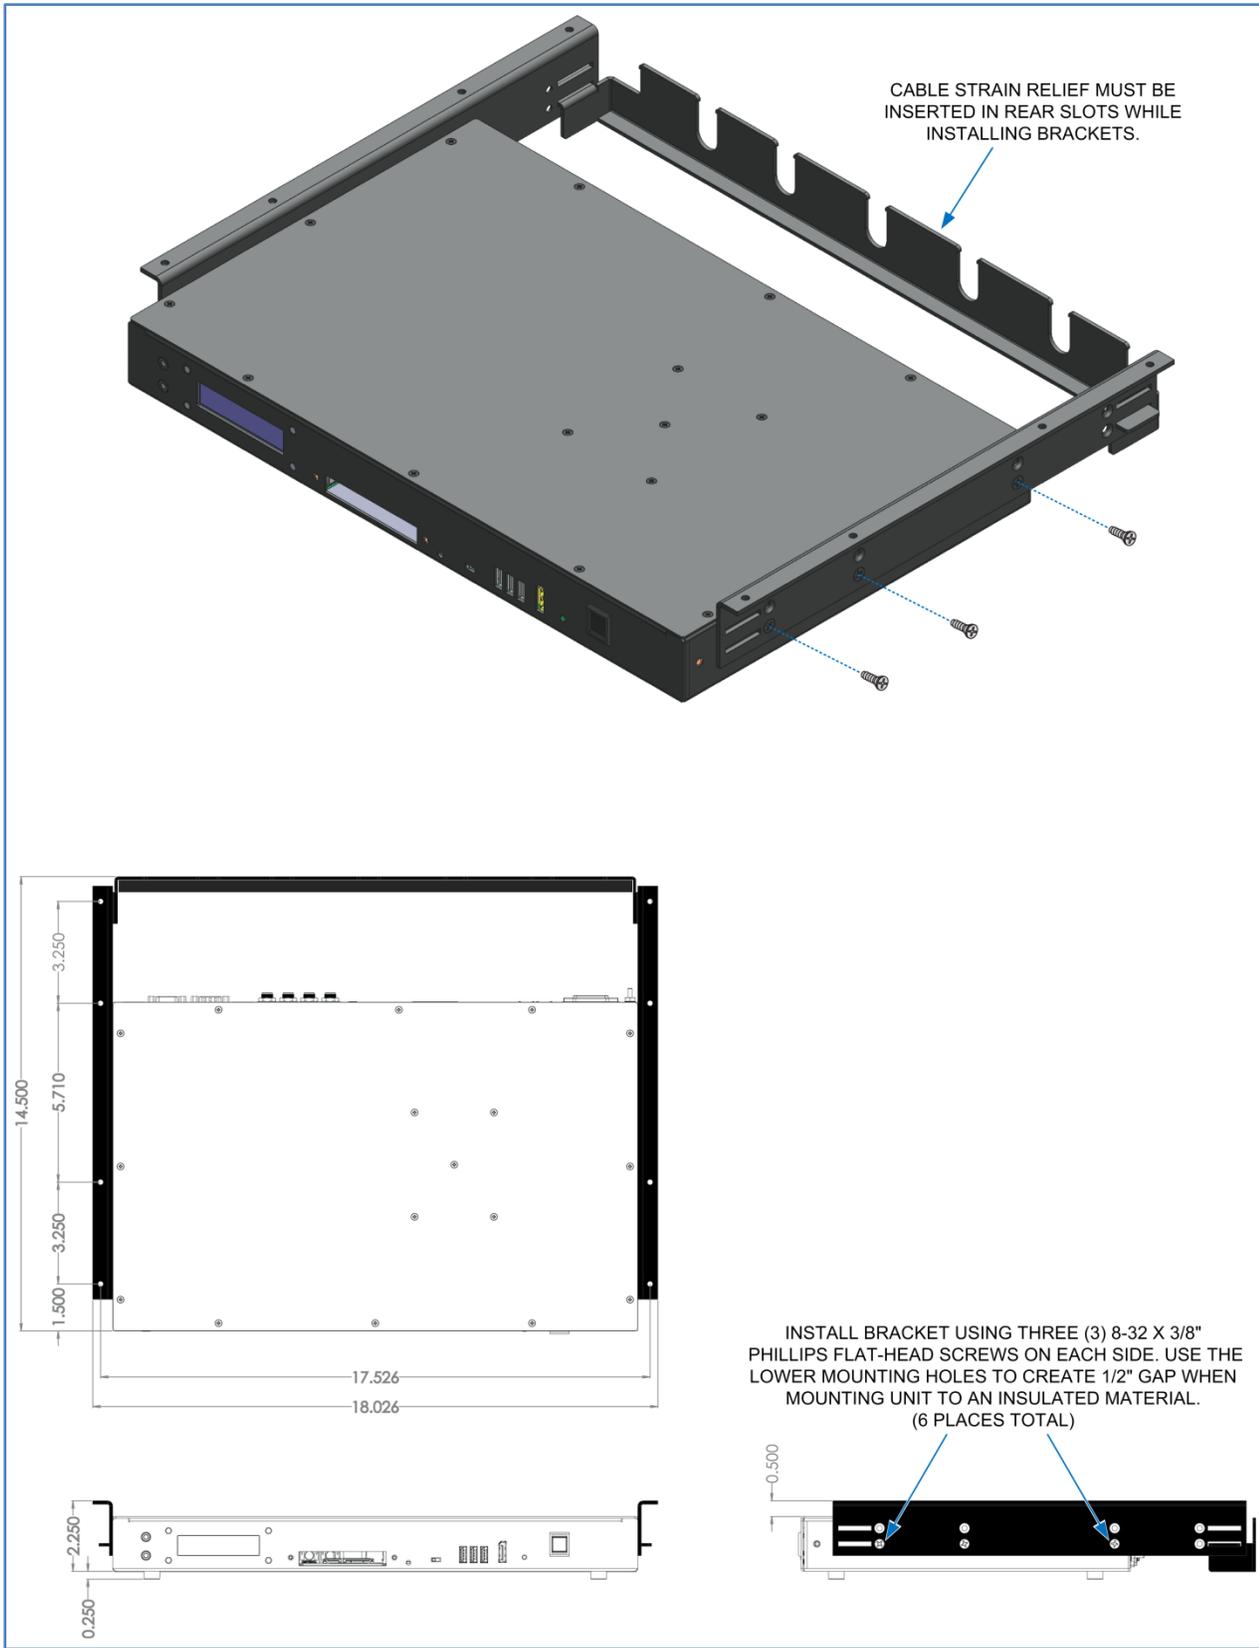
Attaching Brackets for Under the Desk Mounting with Air-Gap
